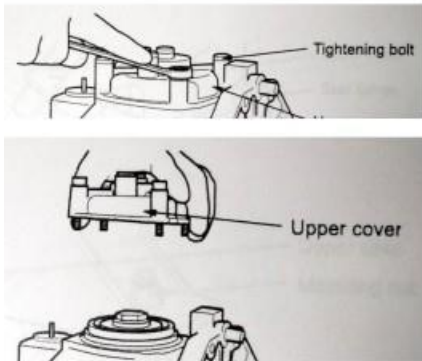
shows the first part of step one. Before actually opening the cap, it is recommended to pump or siphon out about 200 ml of gear oil. Some sailors did this after removing the cap, we drained oil through the dipstick opening before opening the housing. In any case, you do this so that when you remove the shift lever assembly, gear oil will not run out and get things messy.
